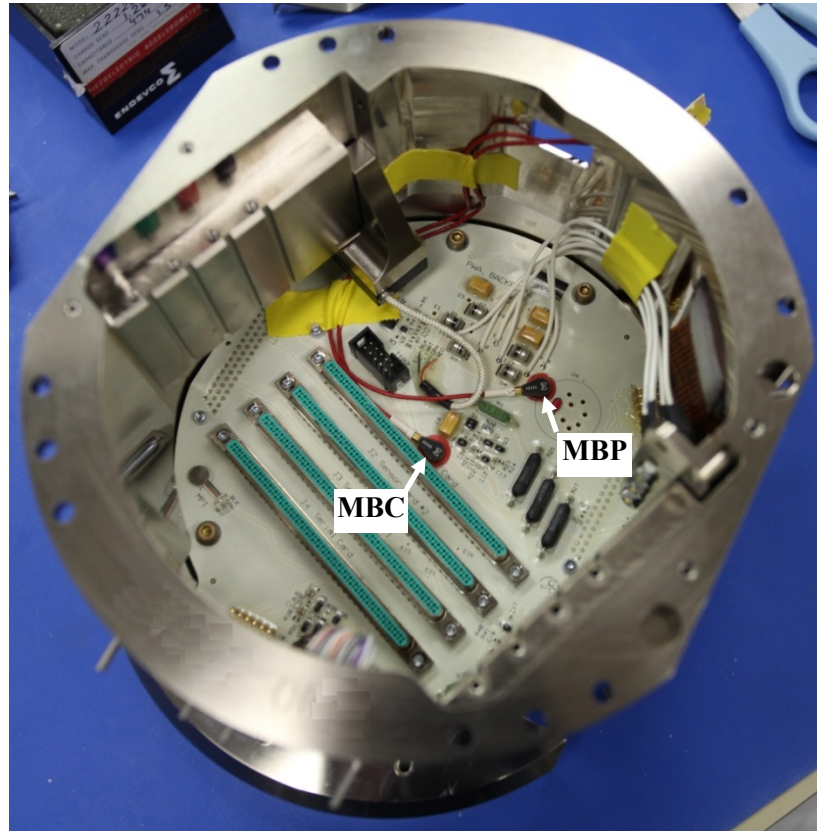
Prototype of concept 1, showing the motherboard. The electronics module, one end cover, and all plug-in cards are removed in this view. The unit was a fully-functional mechanical and electrical prototype containing functional circuit boards. Two accelerometers were attached to the motherboard (channels MBC and MBP).
